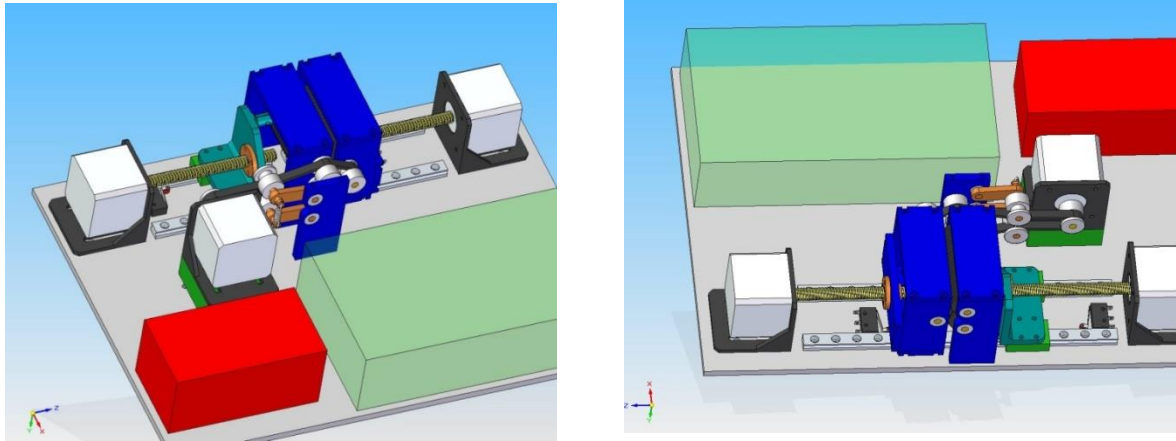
CAD model of the surface preparation tool for UC4: back view (a) and front view (b).
